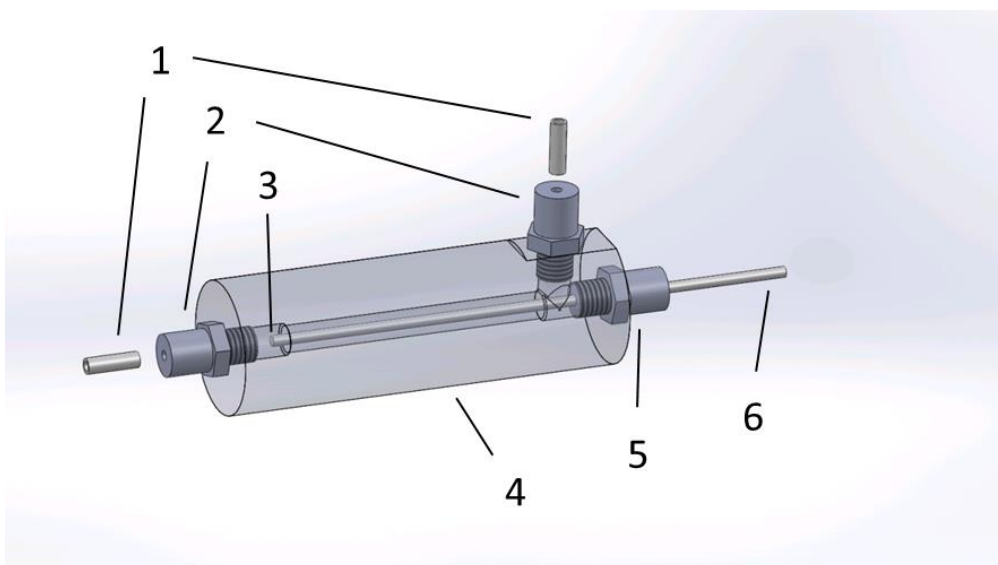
Schematic drawing of the Pt100 thermometer (FEP-coated) in a PVC-U-cylinder case: (1) DN04/06 PTFE-tubing, (2) G1/4" threaded screw-in for DN04/06 tubings, (3) FEP-coated Pt100 measuring
